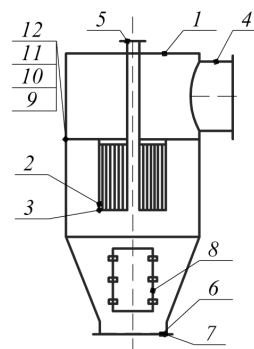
Cross-section of the cylindrical-conical chamber of the drier with a pseudo-liquefied layer of the inert carrier:
